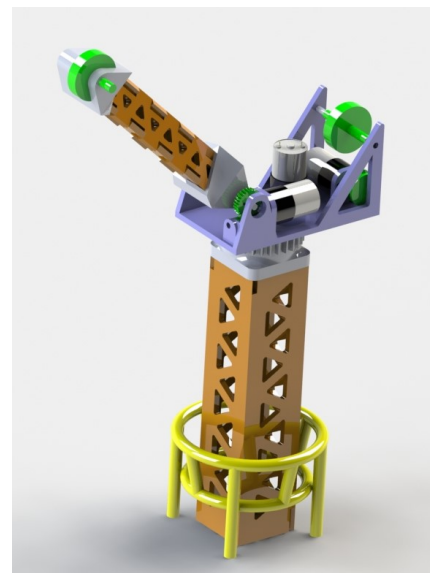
CAD Model of Possible Catch Mechanism on Prototype Crane
